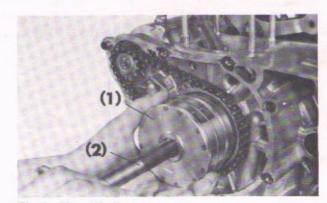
(1) Generator rotor (2) Rotor puller
